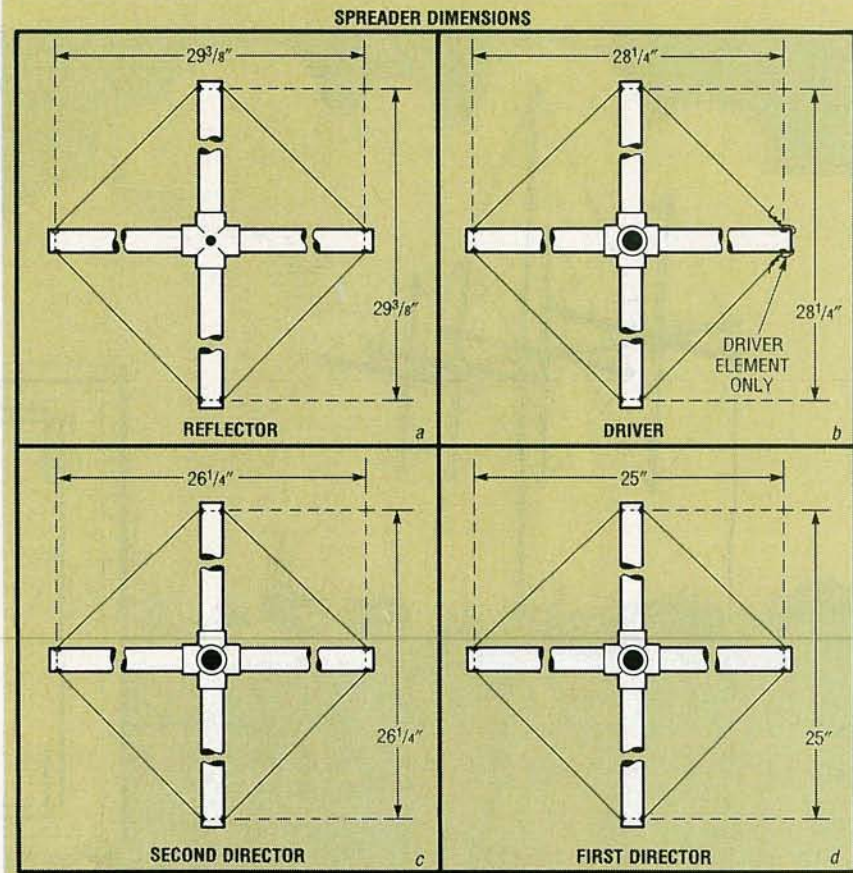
FRONT VIEW OF THE ELEMENT SPREADERS with dimensions; (a) is the reflector, (b) is the driver, (c) is the second director and (d) is the first director.
